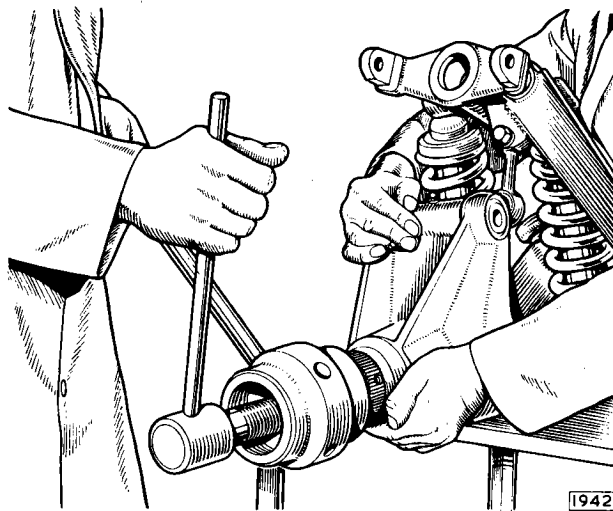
Withdrawing the rear hub and carrier from the half shaft using Churchill Tool No. J7
